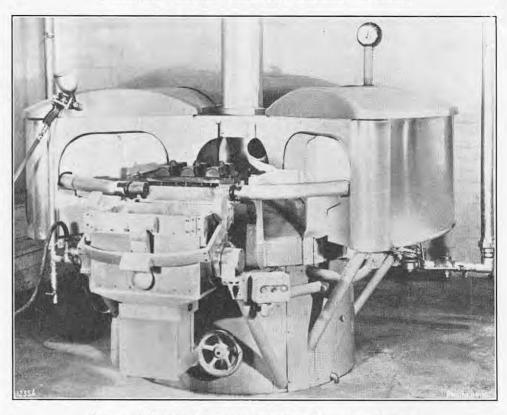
"POLYGRAM" AUTOMATIC SHELL-MOULDING MACHINE.
